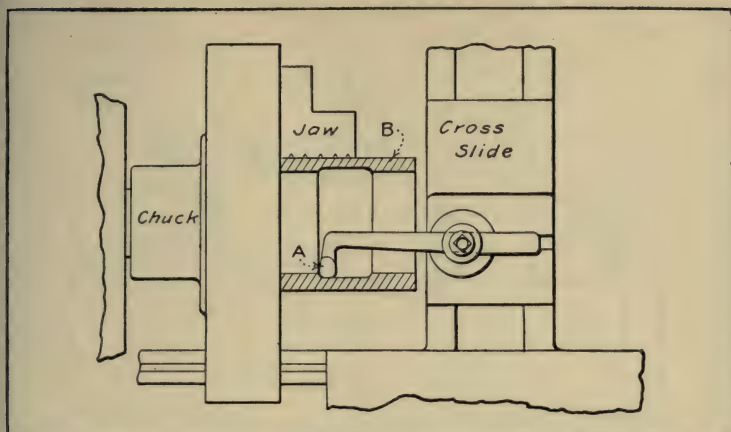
A SIMPLE RECESSING TOOL ON AN ENGINE LATHE
